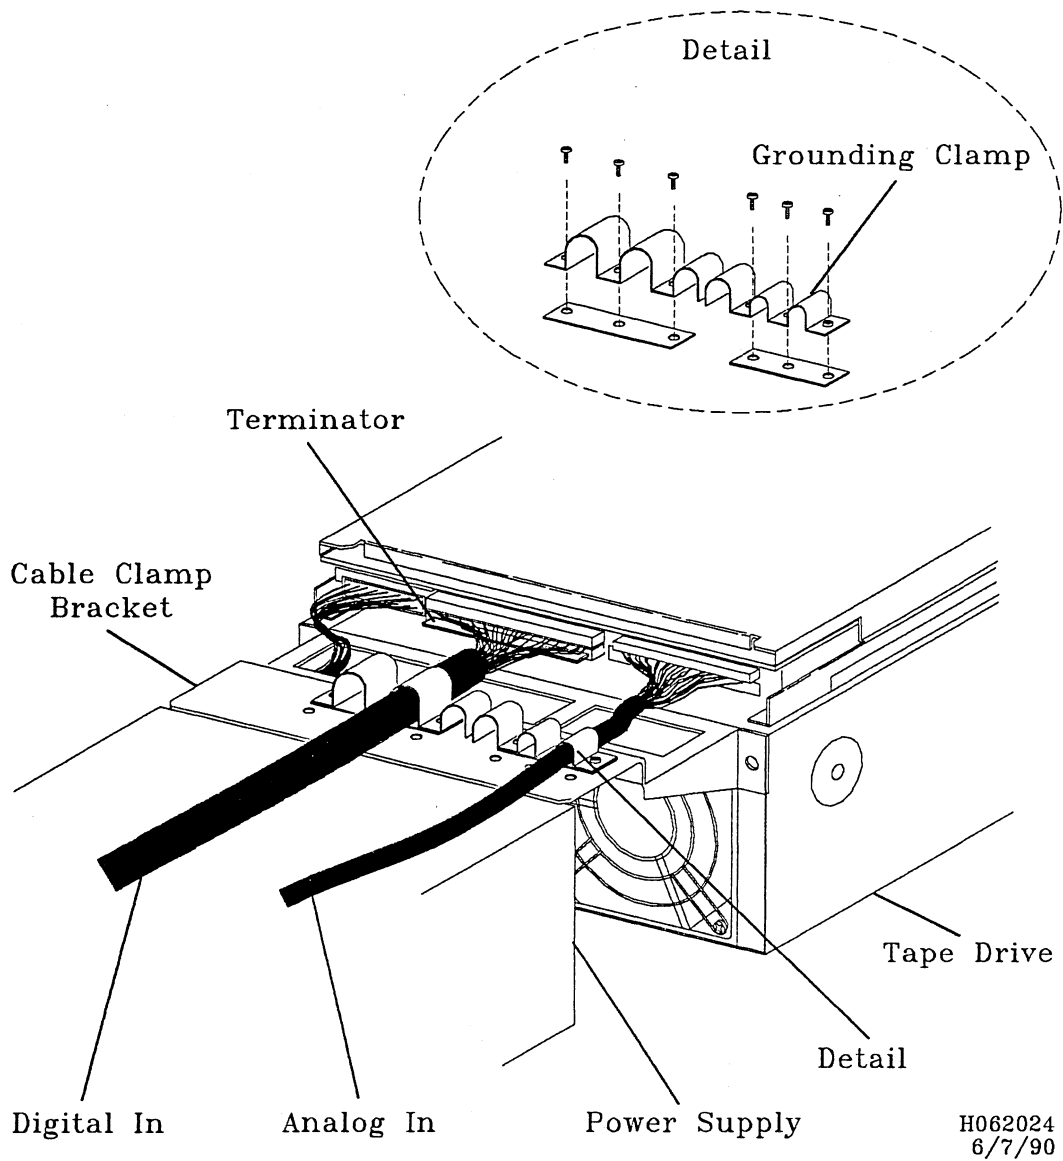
, Cable Shielding Clamp for Intermediate Tape Drives
